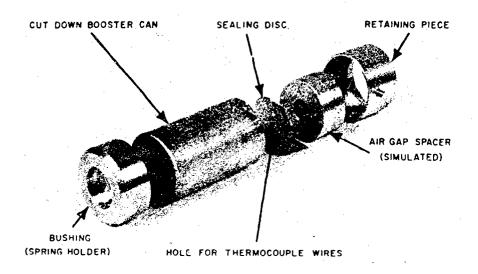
EXPANDED VIEW OF BOOSTER CASE ASSEMBLY
